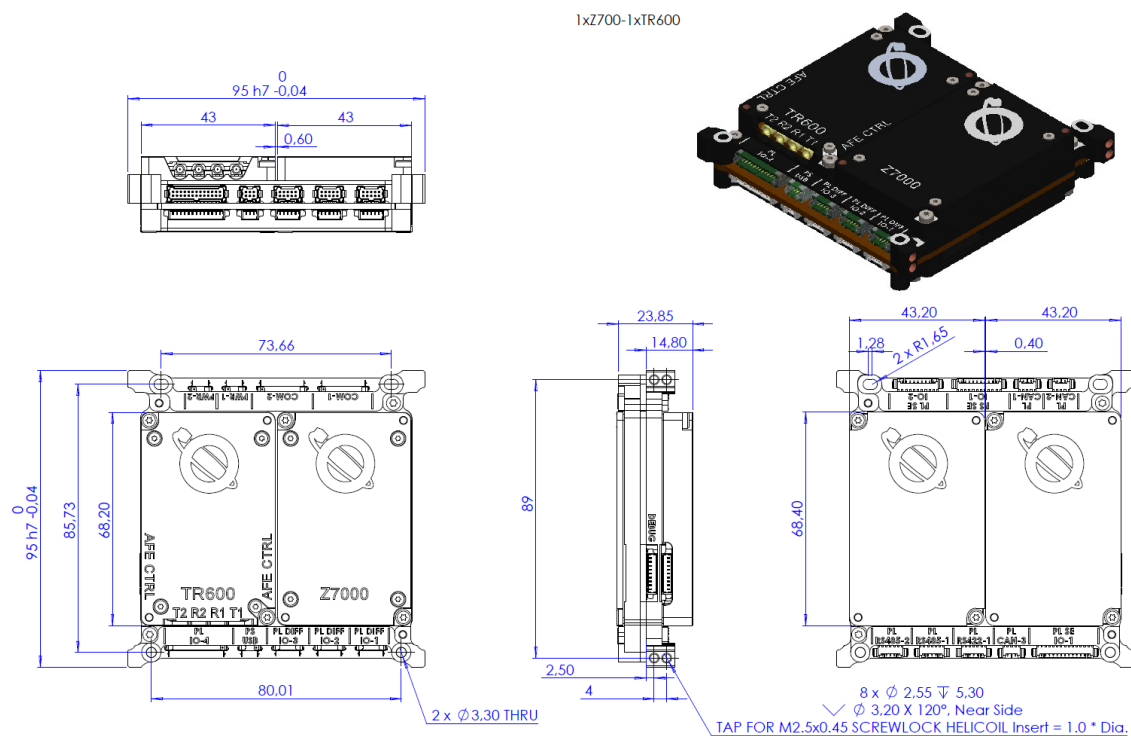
NanoCom SDR MK3 with 1xTR600 mechanical drawing (all dimensions are in mm)
